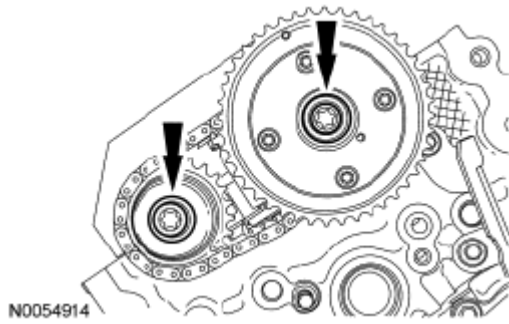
Locating VCT Assembly Bolt & RH Exhaust Camshaft Sprocket Bolt
